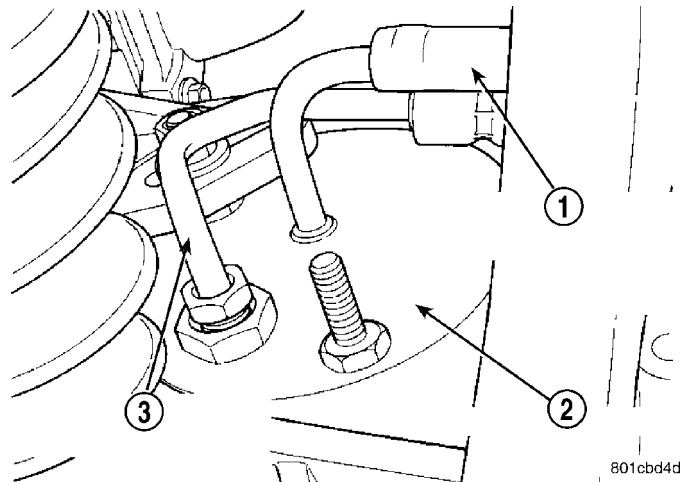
Pressure Hose Connection To Power Steering Pump - 2.4L Engine
